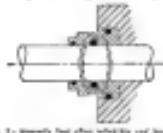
Magnetic seal after assembly and test in initial shaft sealing condition.
